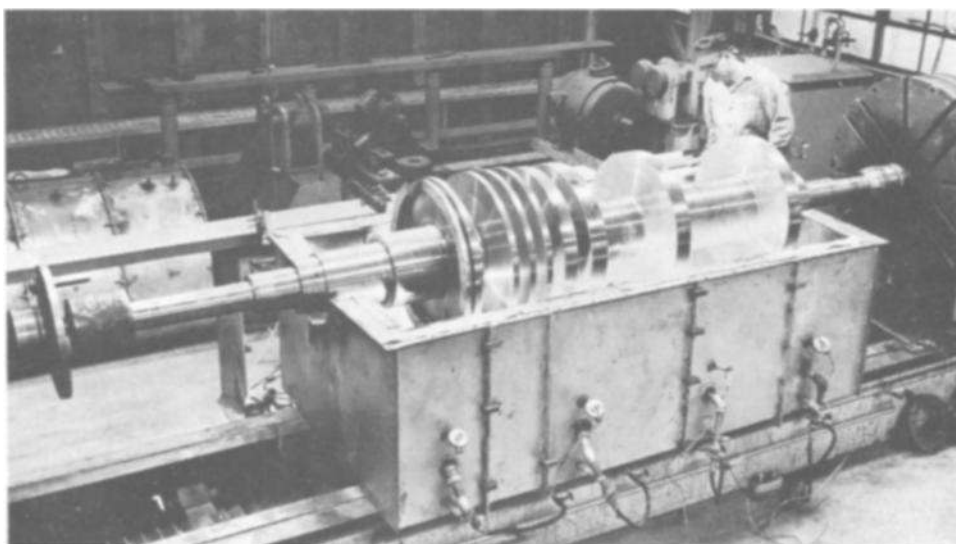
An example of a heat indicating lathe with a steam turbine rotor forging installed. When the upper cover of the furnace is installed the rotor can be brought up to the required temperature while rotating. Indicator rods inserted through the furnace wall touch the rotor at designated points and their deflection is recorded during the period of the test. (Courtesy Ellwood National Forge Company)
